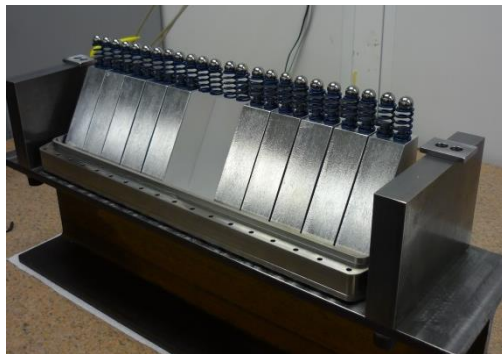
Test Set-Up, springs in place over wedges during initial assembly
